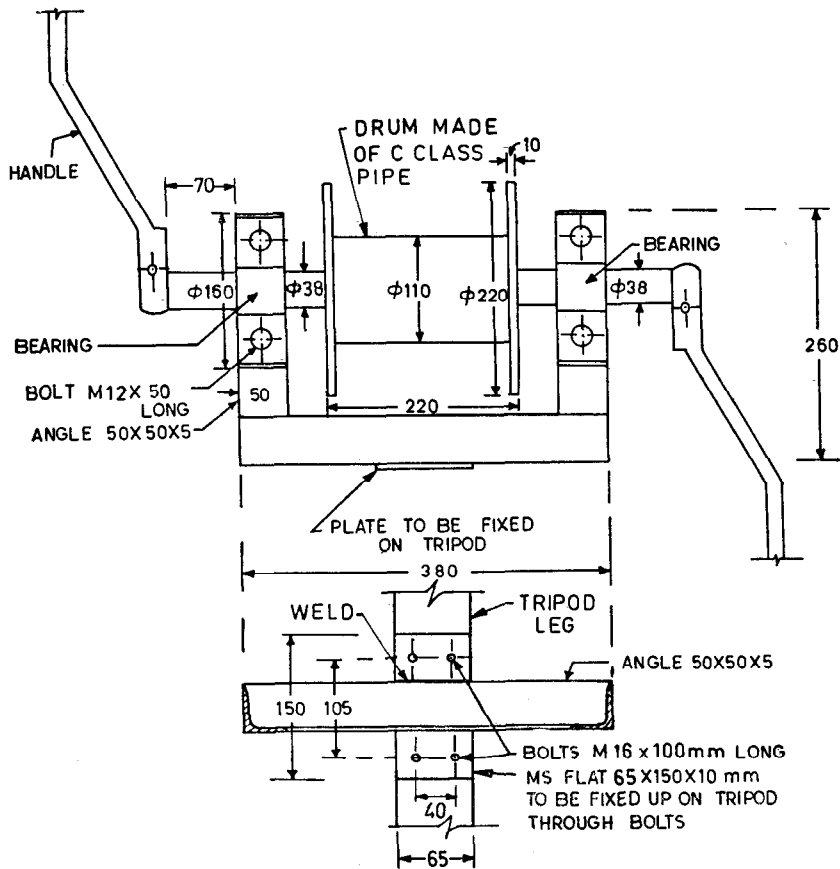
DETAILS OF HOISTING EQUIPMENTS TYPE B — *Contd
